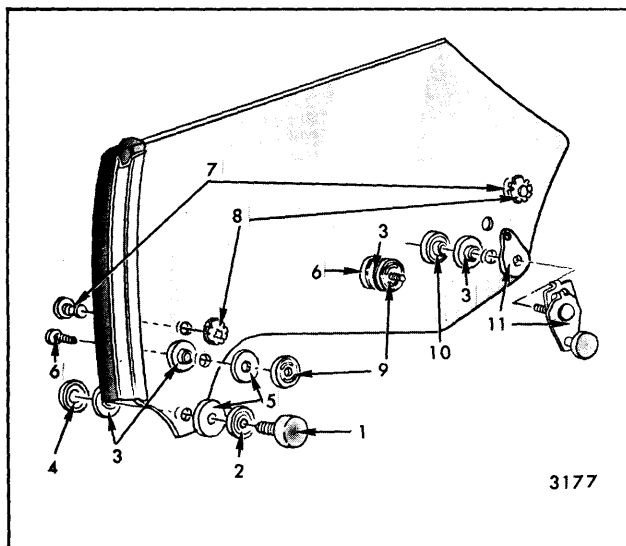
Rear Door Window Assembly - “B-39” and “C-39, 49 and 69” Styles
